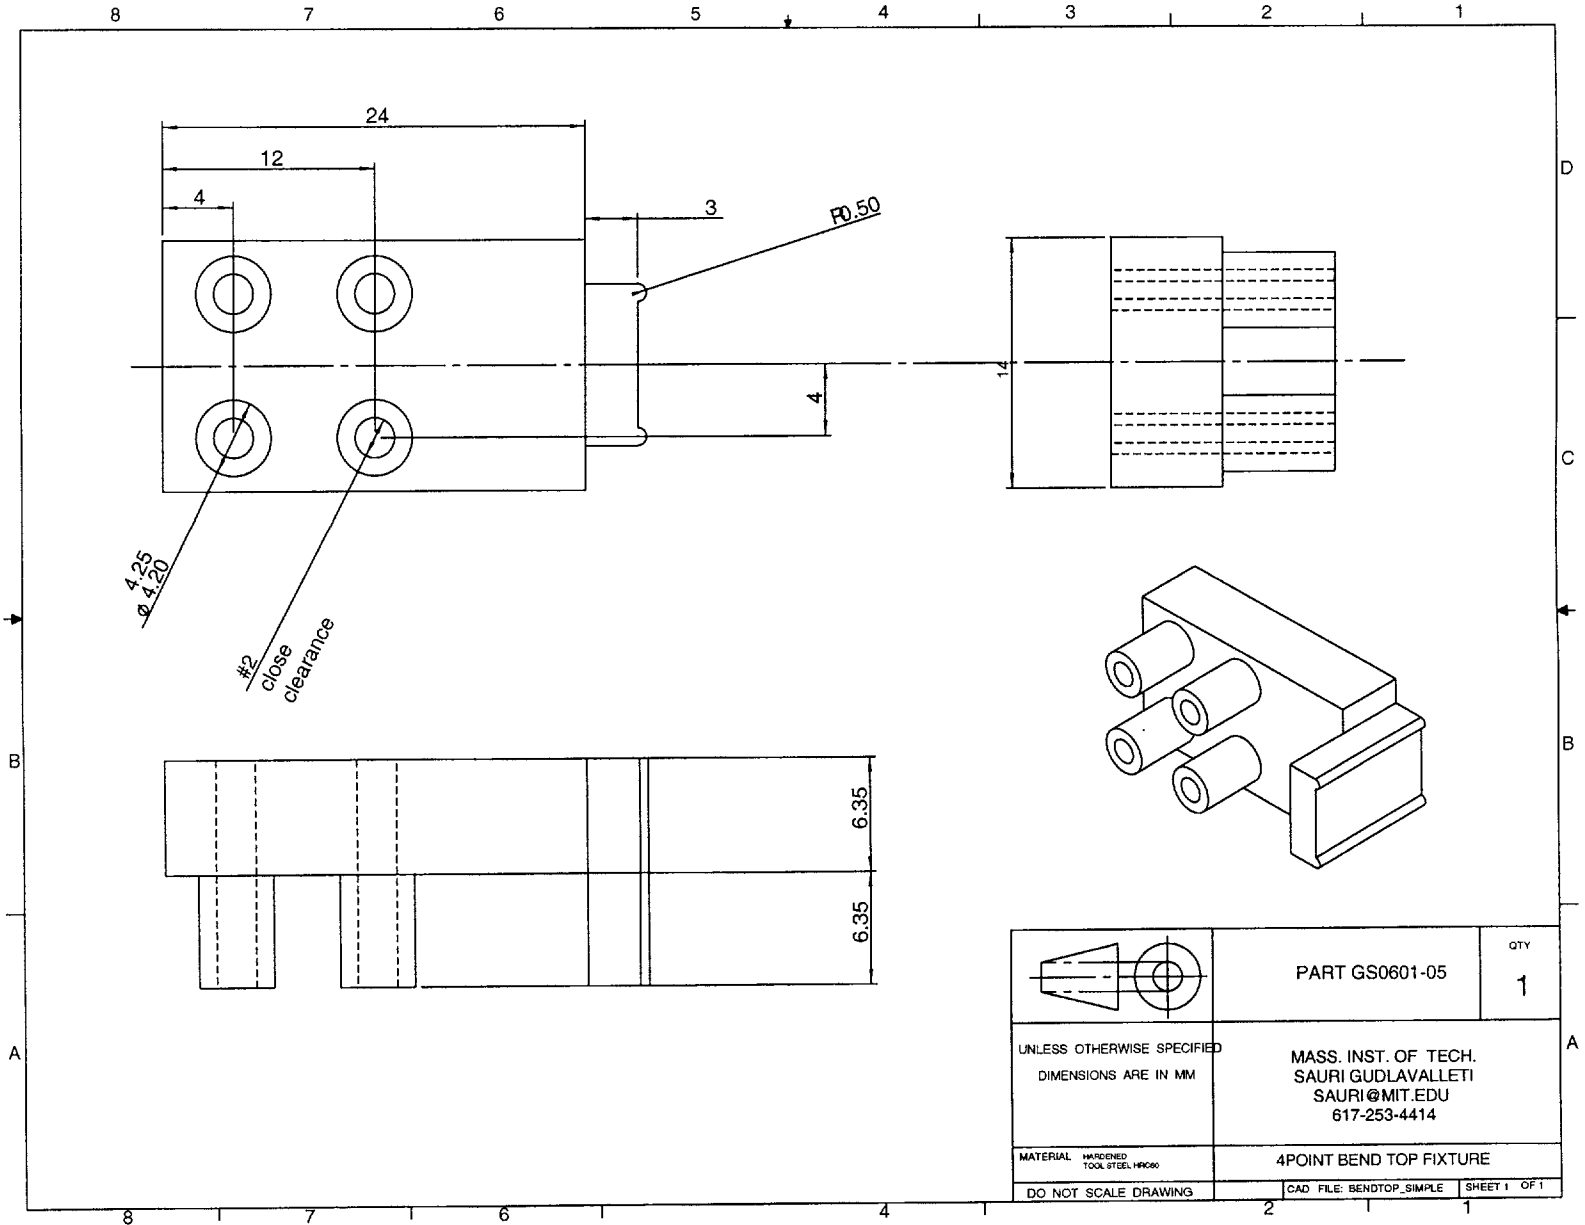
Part GS 0601-05. 4 Point bend fixture with 8 mm span for use in the multiple span bending fixtures. Ref. Fig. 4-6 for an assembly drawing.
